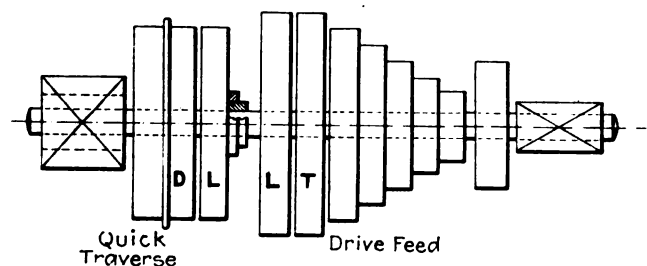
COUNTERSHAFT WITH THREE DRIVES
